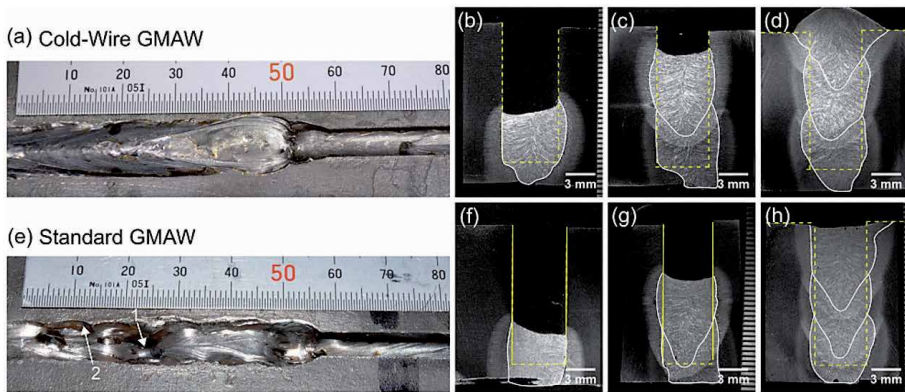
Appearance and cross section of the bead for welds: (a-d) CW-GMAW; (e-h) GMAW.
